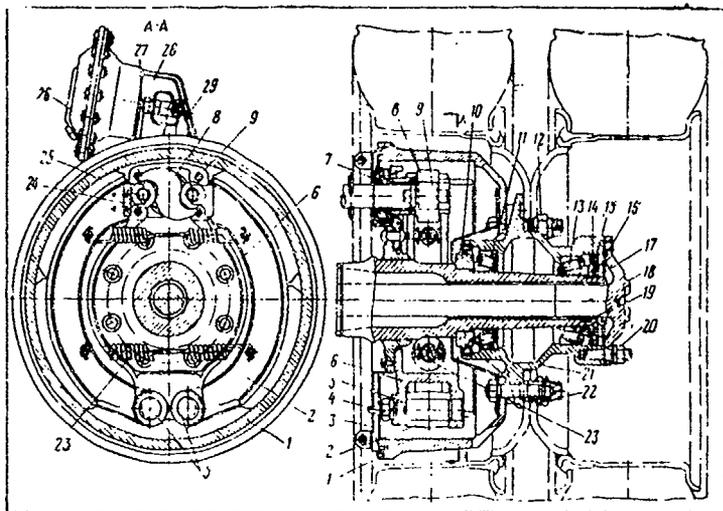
Brake Mechanism of Rear Wheel of ZIL-130 Motor Vehicle: 1, brake drum; 2, brake shoe; 3, shield; 4 and 20, nuts; 5, shoe axes; 6, support; 7 and 28, spreader cam brackets; 8, spreader cam; 9, roller; 10 and 14, glands; 11 and 13, bearings; 12, cap nut; 15, adjusting nut; 16, locking ring; 17, counter nut; 18, half axle; 19, half axle cover; 21, hub; 22, internal nut; 23, retracting spring; 24, roller support; 25, roller shaft; 26, brake cylinder; 27, shaft; 29, adjusting lever
